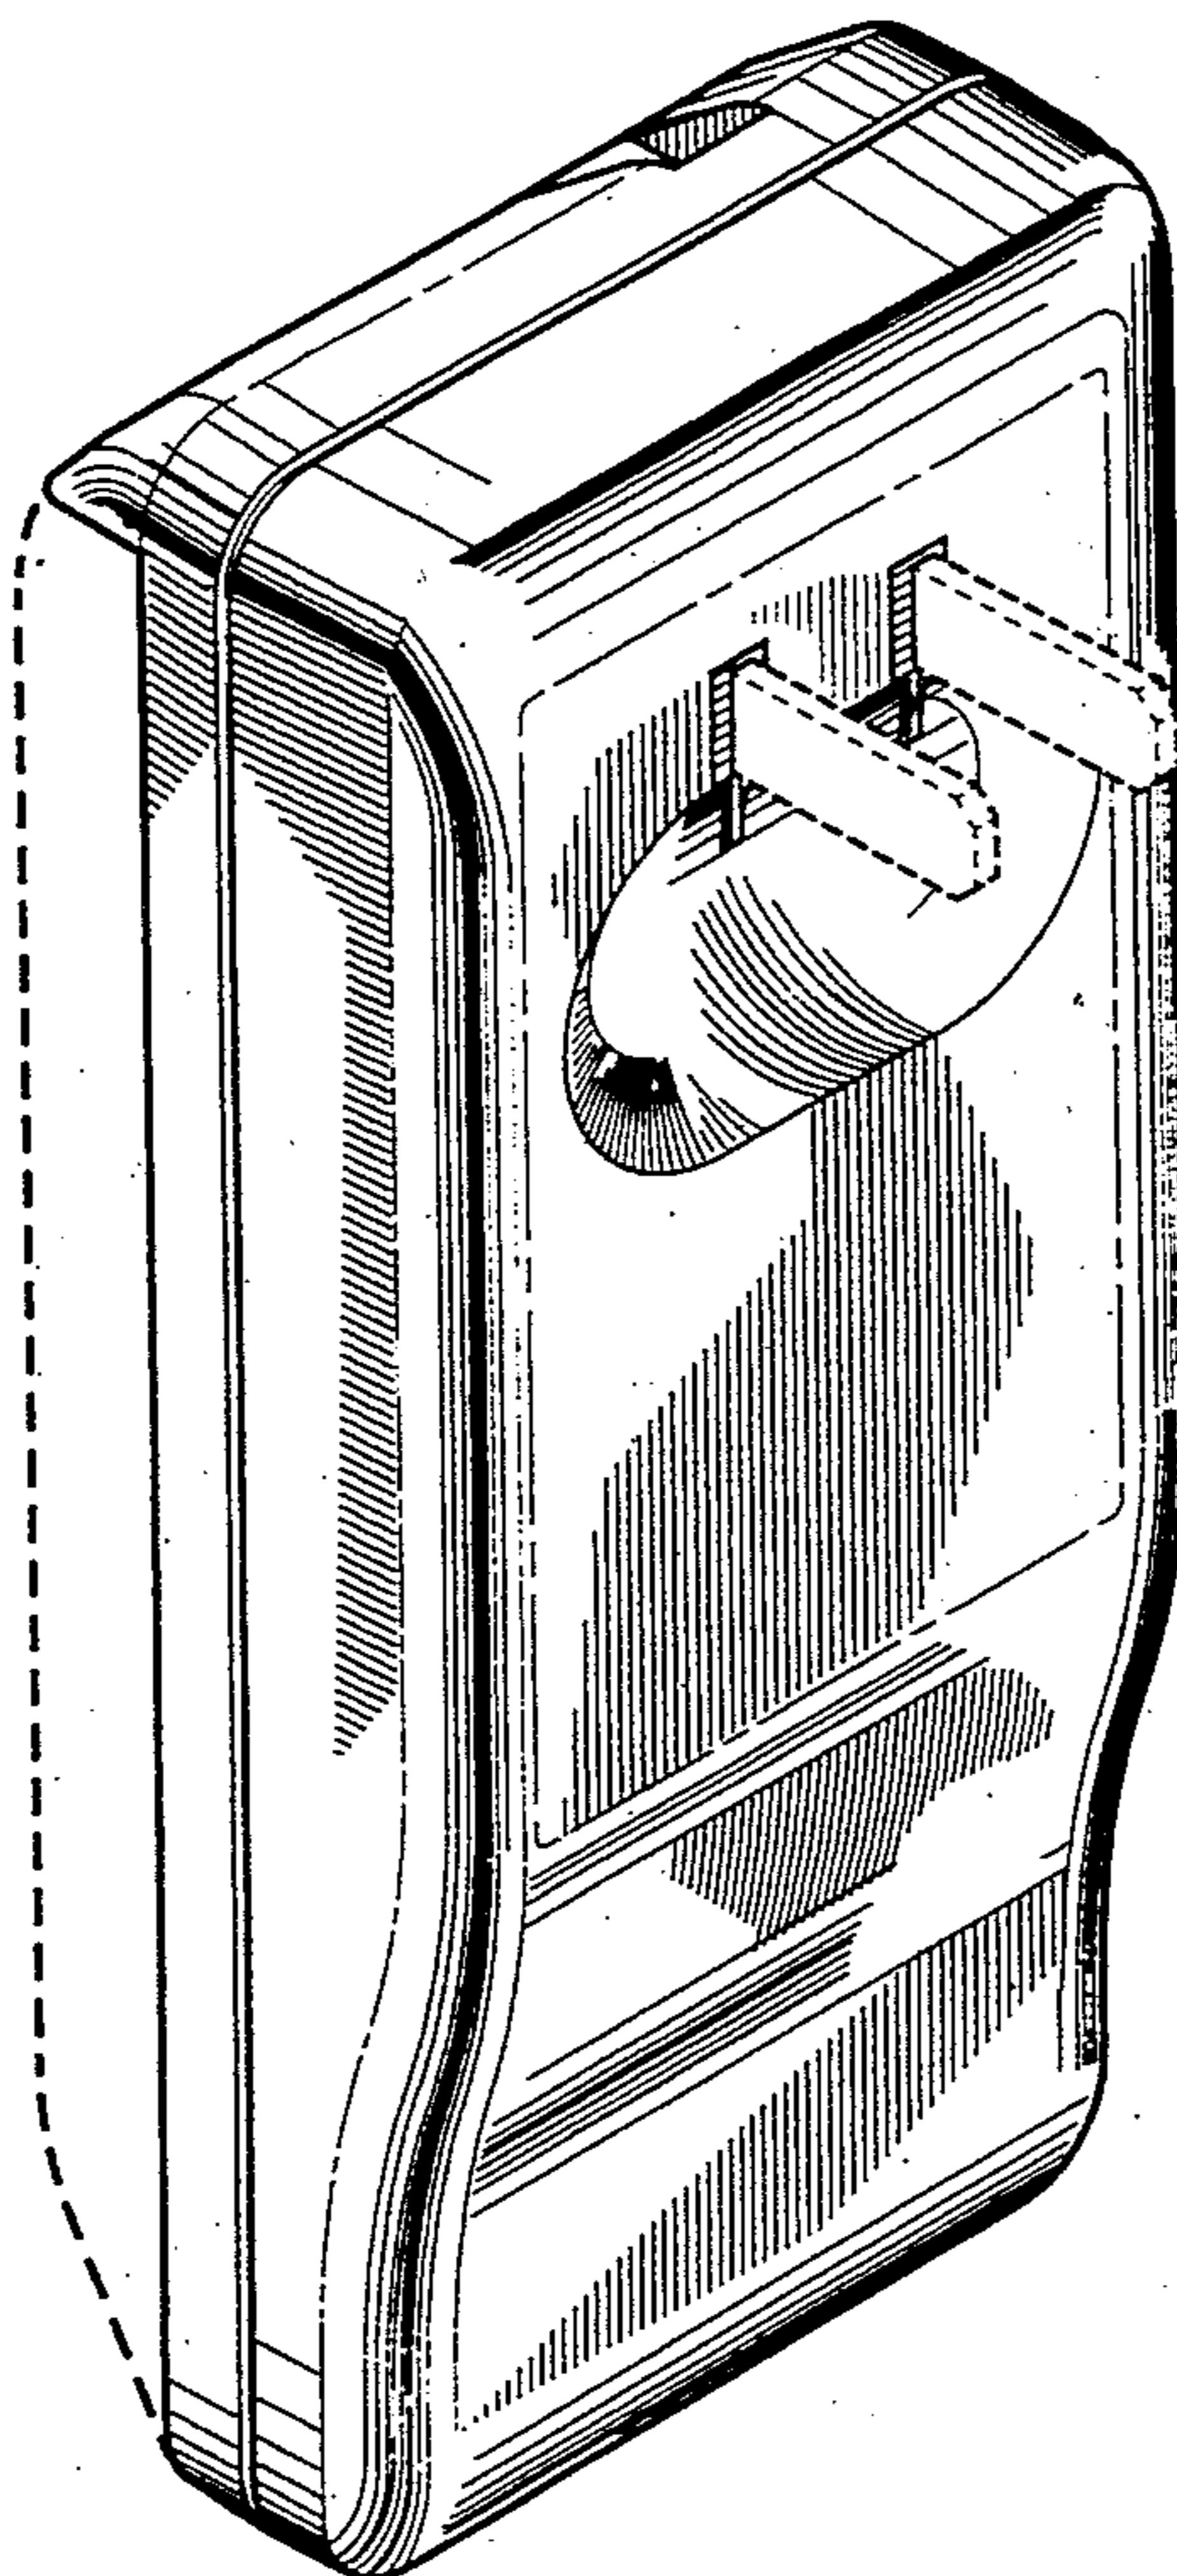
is a top, front and left side perspective view of a housing for a battery charger showing our new design; FIG. 2 is a right side elevational view thereof, the left side elevational view thereof being a mirror image; FIG. 3 is a bottom side elevational view thereof; FIG. 4 is a top side elevational view thereof; and, FIG. 5 is a rear plan view thereof.
